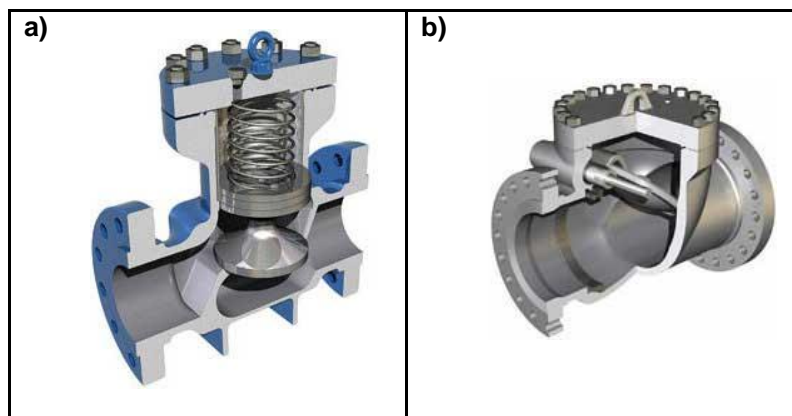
Sectional view of NRV: a) piston type; and b) swing type⁶
